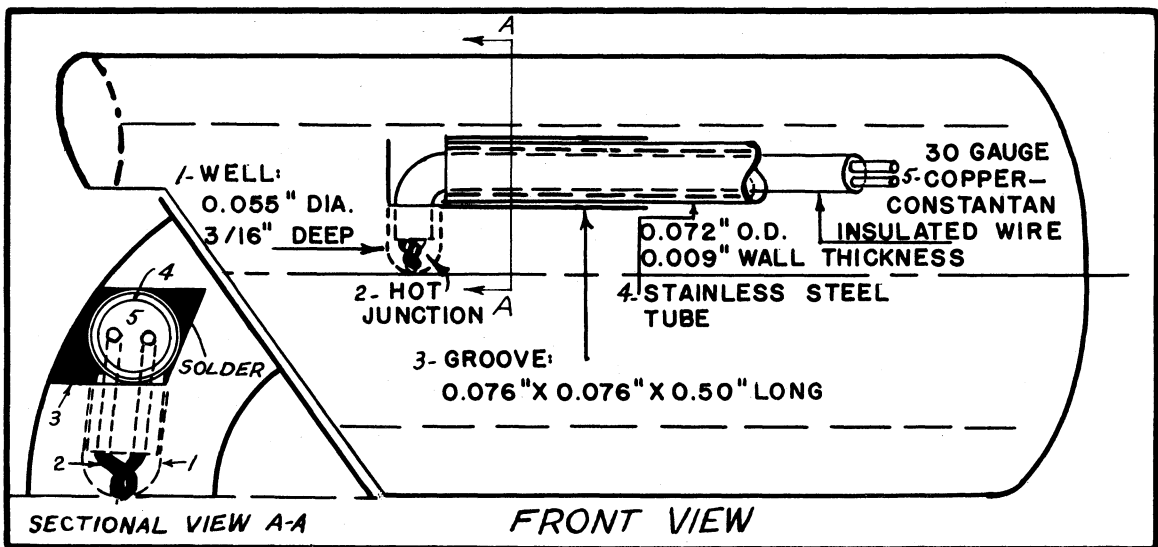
DETAILS OF WALL THERMOCOUPLE INSTALLATION
